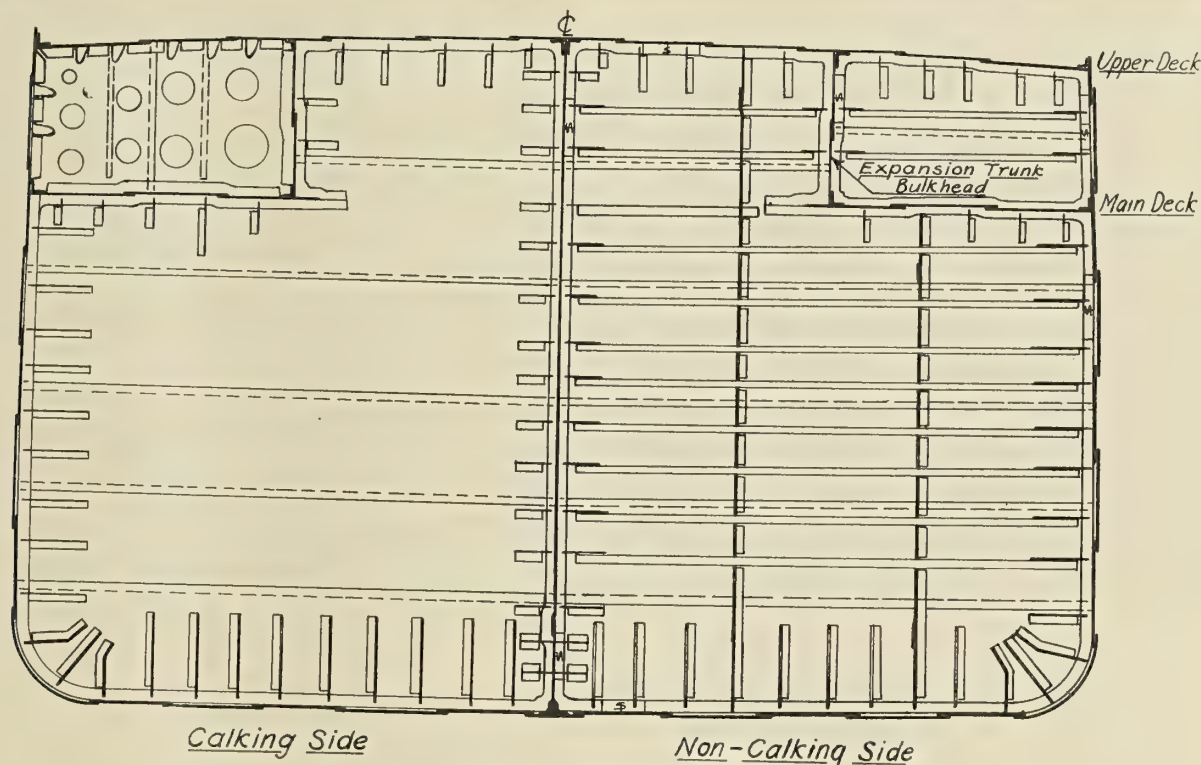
Construction of Bulkhead for an Oil Tanker
